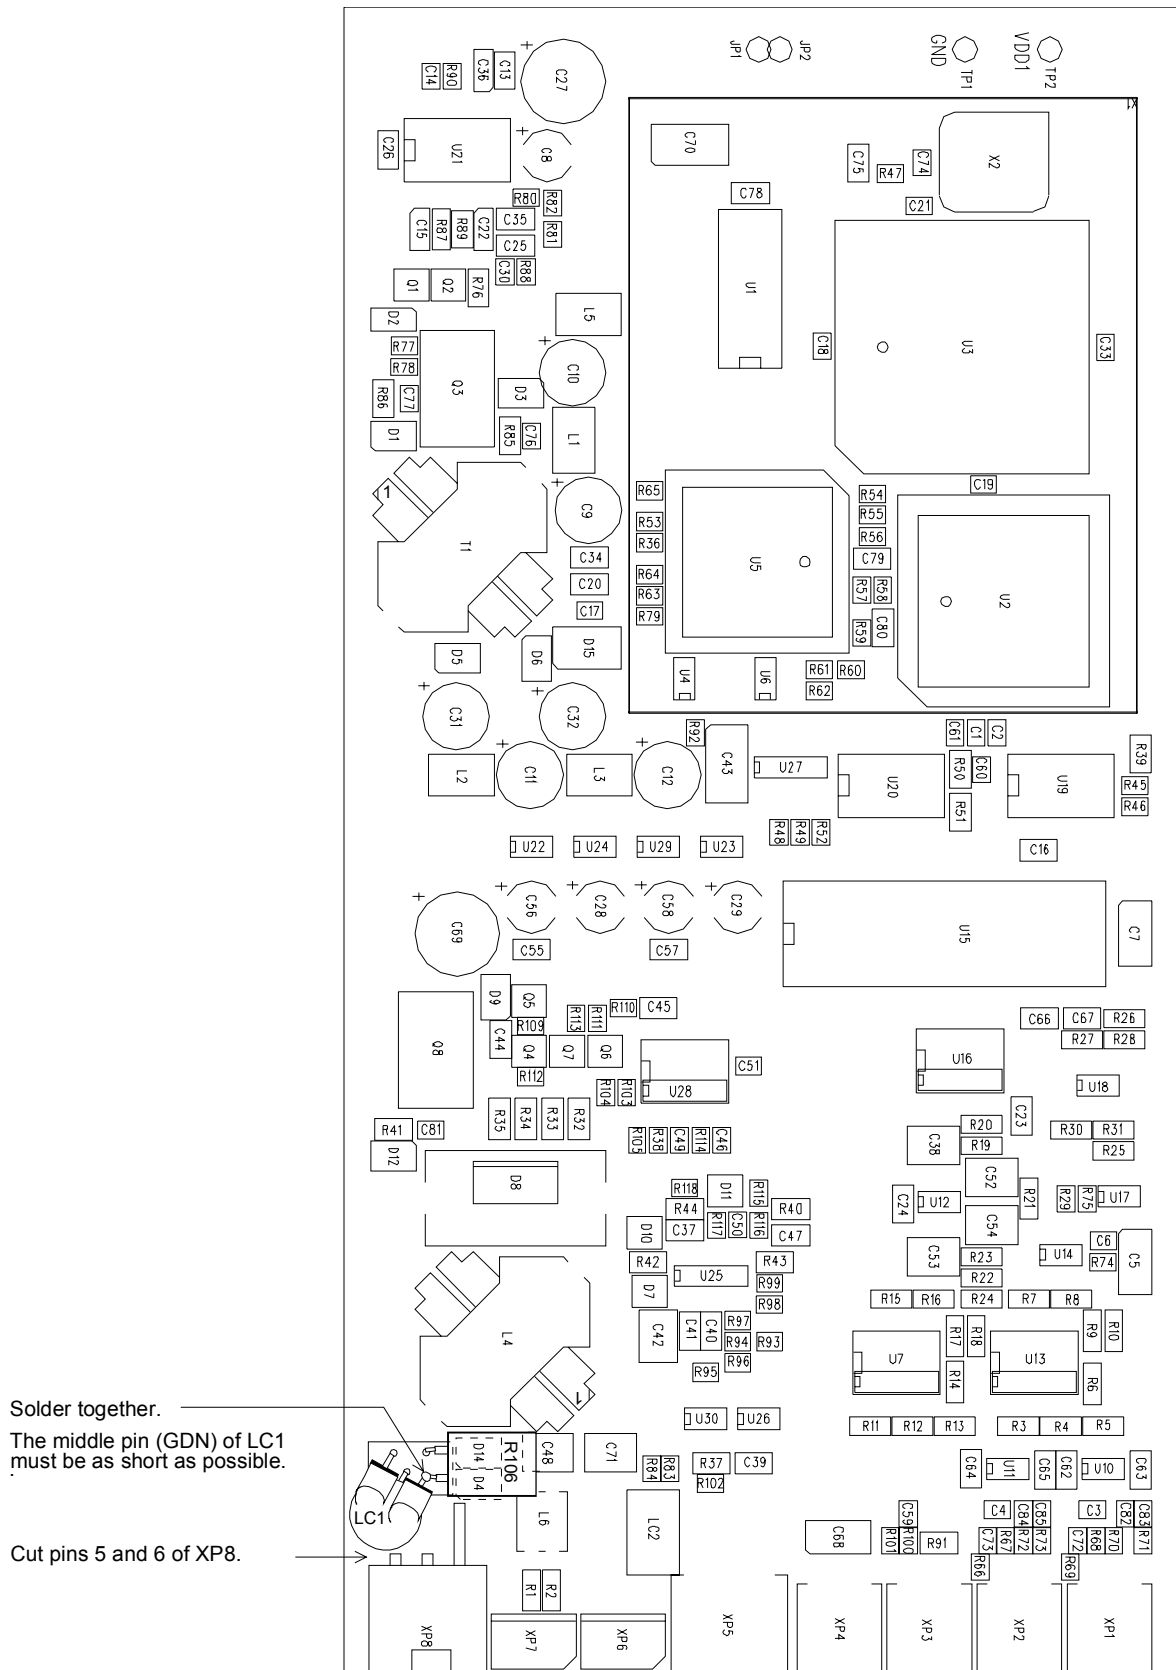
THE COMPONENT LAYOUT OF PHOTO3
